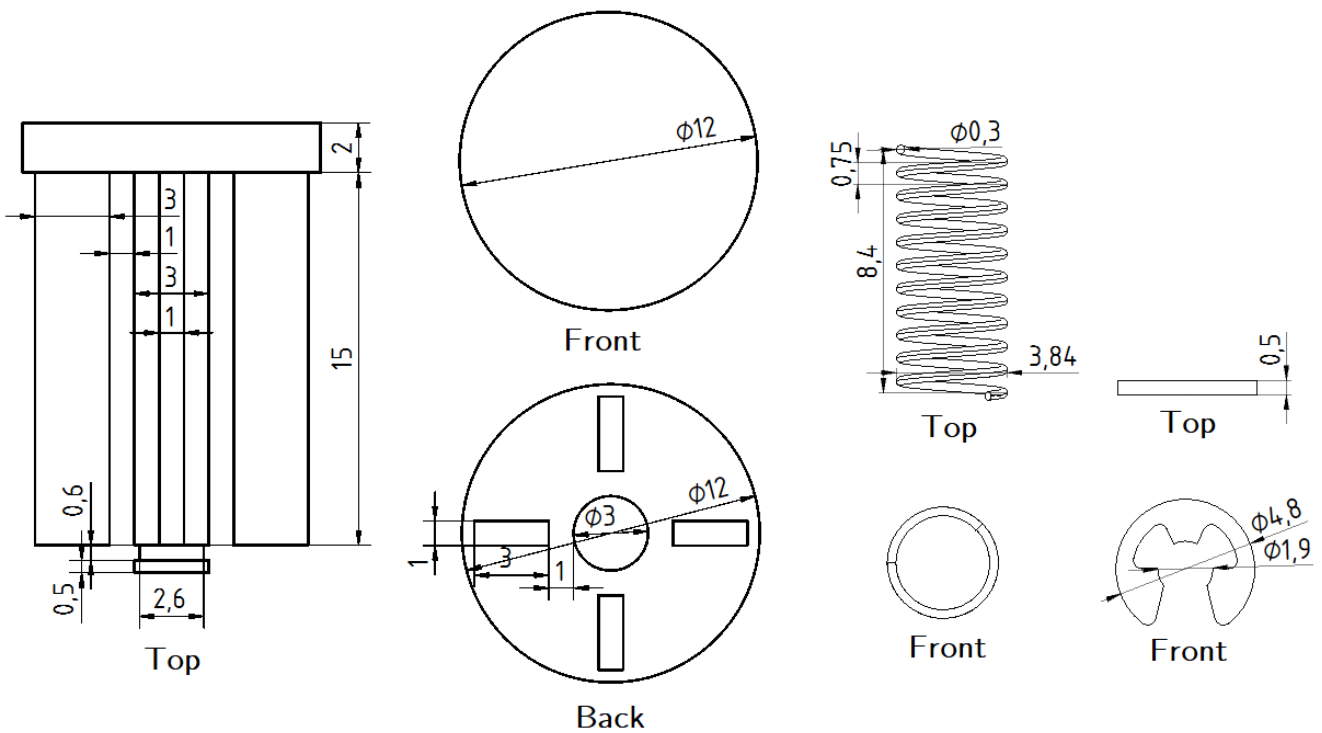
Technical drawing of the press that slides in the bulk holder, spring, and clip. Units of length are in millimeters.
